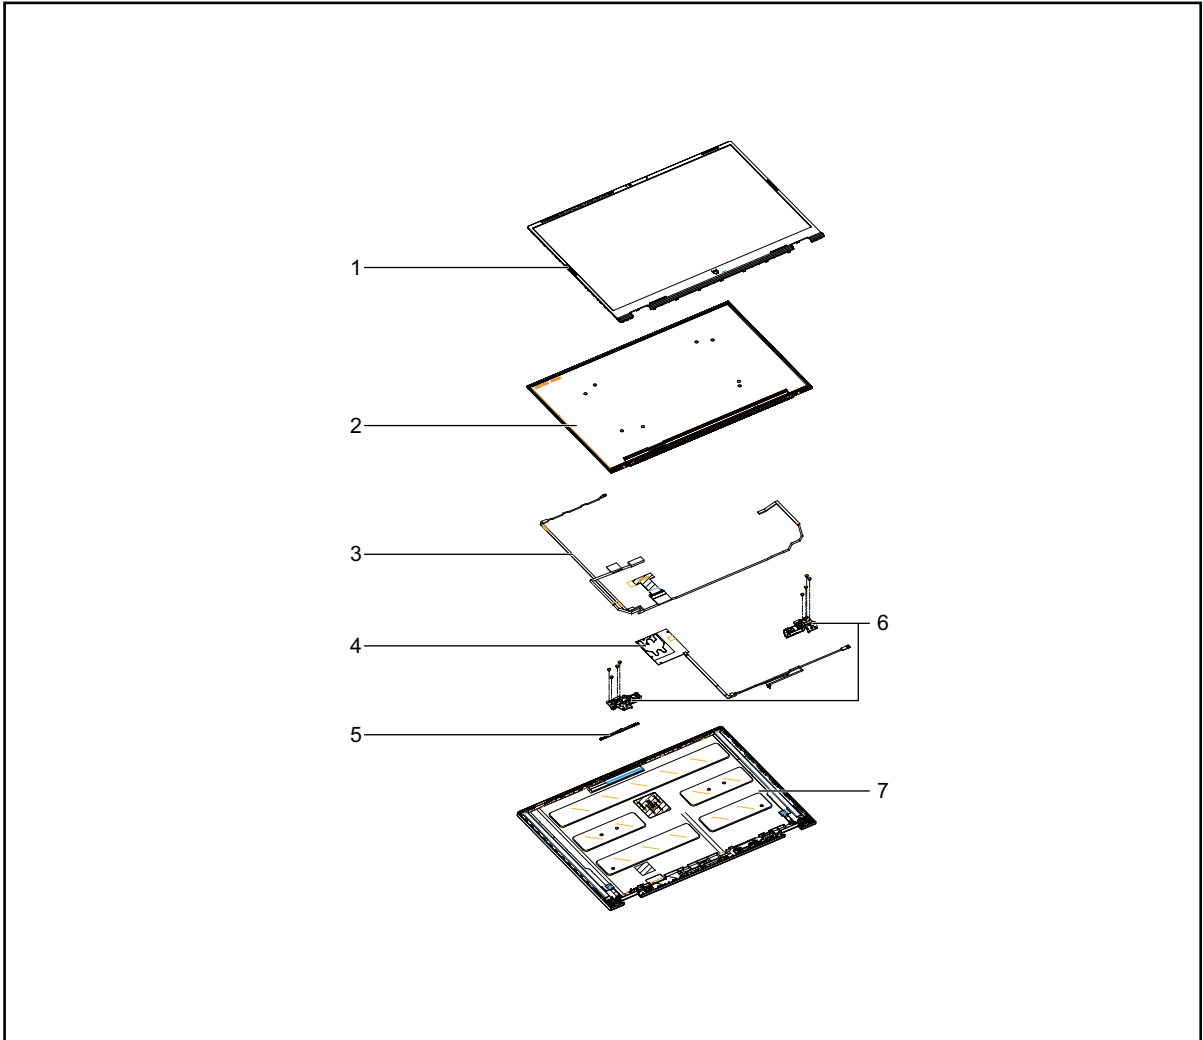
Upper Case Assembly Exploded Diagram
